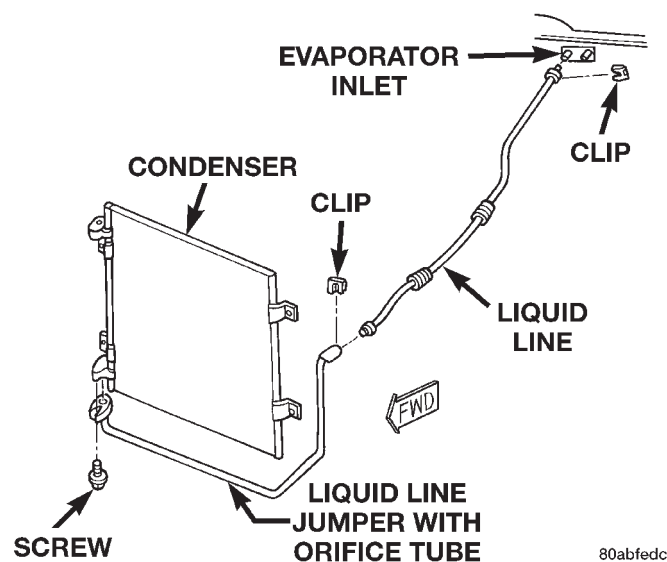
Liquid Line Remove/Install - Right-Hand Drive 2.5L Engine
